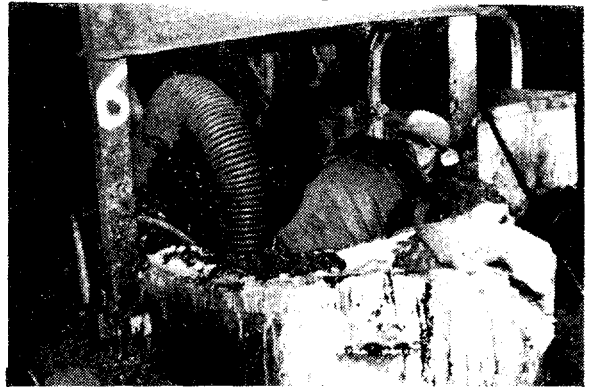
Flexible exhaust hose during chipping out of ladle linings.
